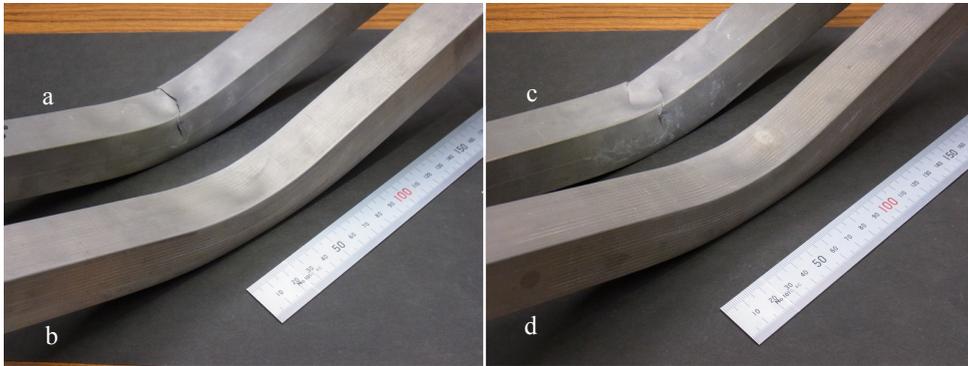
Appearance of specimens after press bending. (a) TP350 without axial tension, (b) TP350 stretch bending, (c) TP450 without axial tension and (d) TP450 stretch bending.
